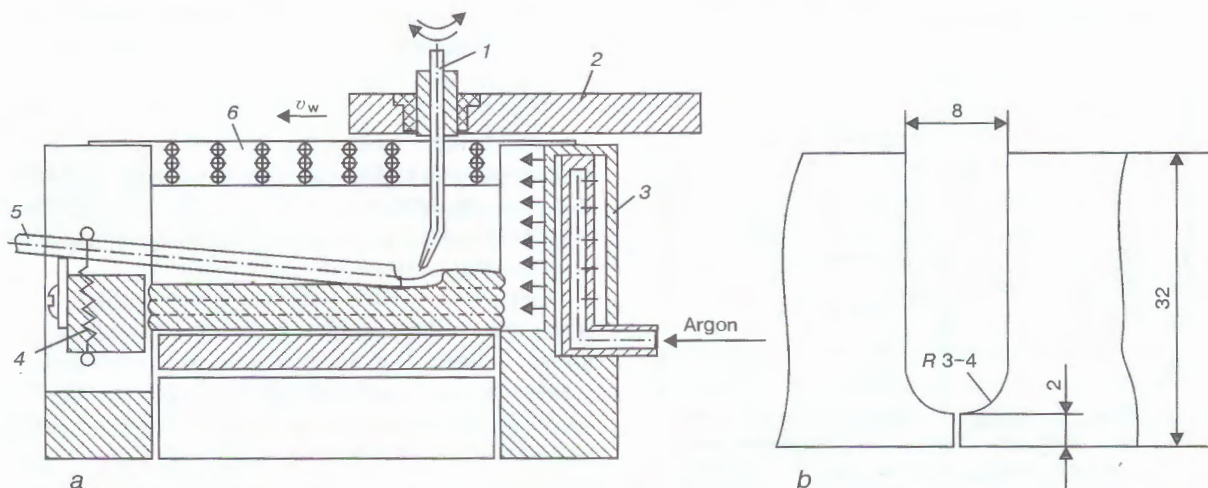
Scheme of process of narrow-gap argon arc welding with rotating bent tungsten electrode (*a*): 1 — tungsten electrode; 2 — movable gate; 3 — sprayer; 4 — clamping device; 5 — rod; 6 — protective cover plates; and scheme of edge preparation (*b*)
